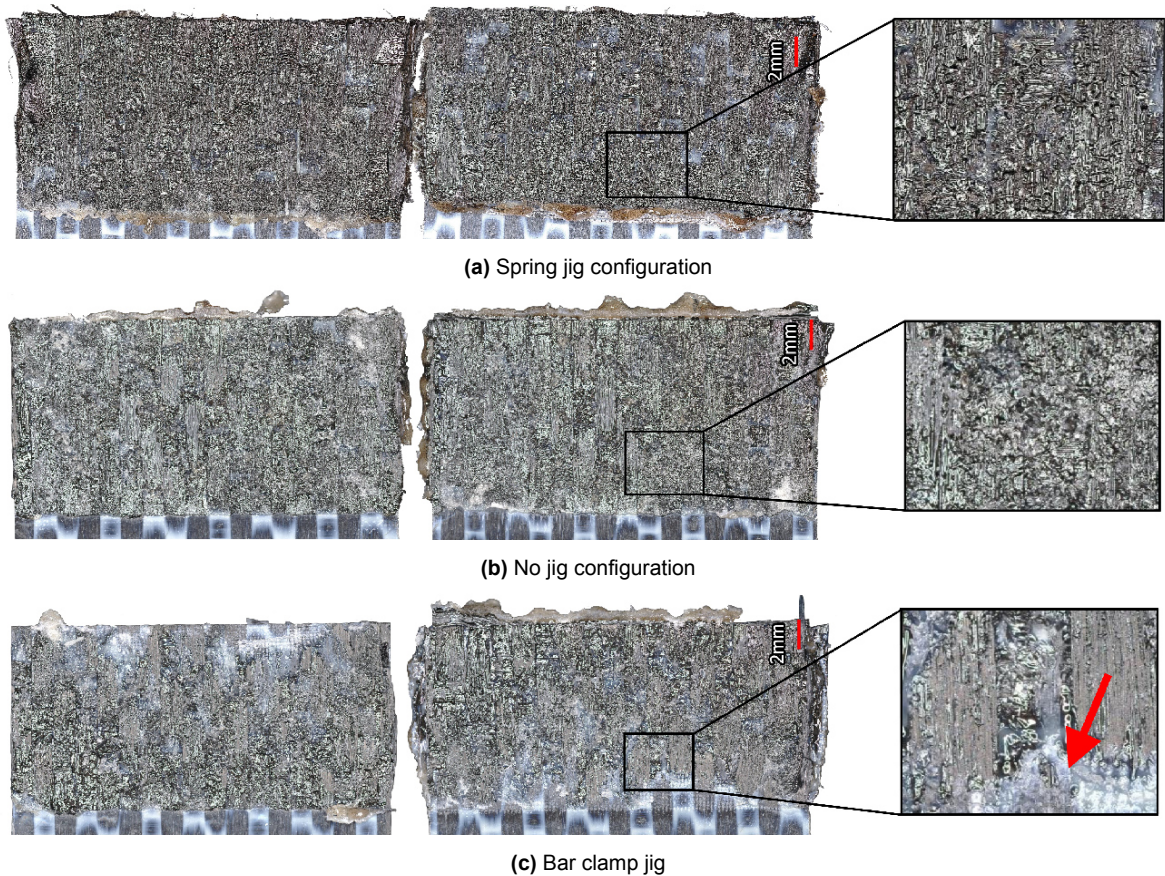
Fracture surface of specimens welded without consolidation using three different jig configurations; the red arrow shows traces of intact energy director; Vibration amplitude (peak-to-peak) : 80 μm , welding pressure : 1.6 MPa (500 N), weld control - displacement to 0.07 mm
